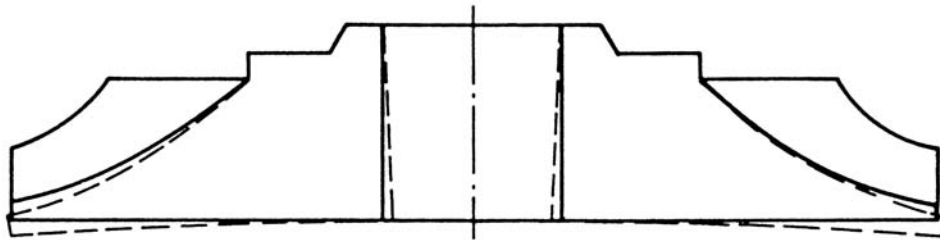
Typical distortion pattern in impeller due to quenching. (From Ref. 35.)
